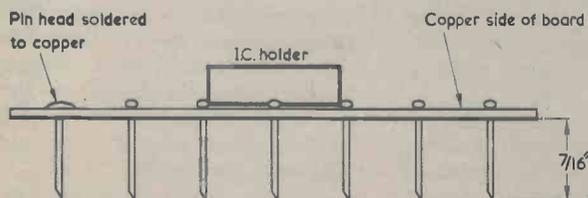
Side view illustrating the method of assembly. In practice, the i.c. holder is fitted to the board after all the pin heads have been soldered to their copper areas
